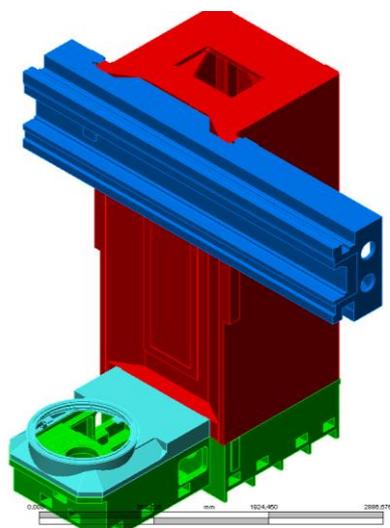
CAD model of the machine-tool frame [Ucen 2014]
